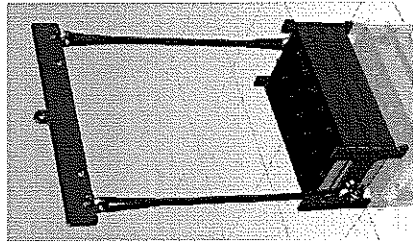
RENDER OF THE POST MOLD SHOWN ROTATED ON ITS SIDE USING THE SIDE LIFTING ARRANGEMENT.
